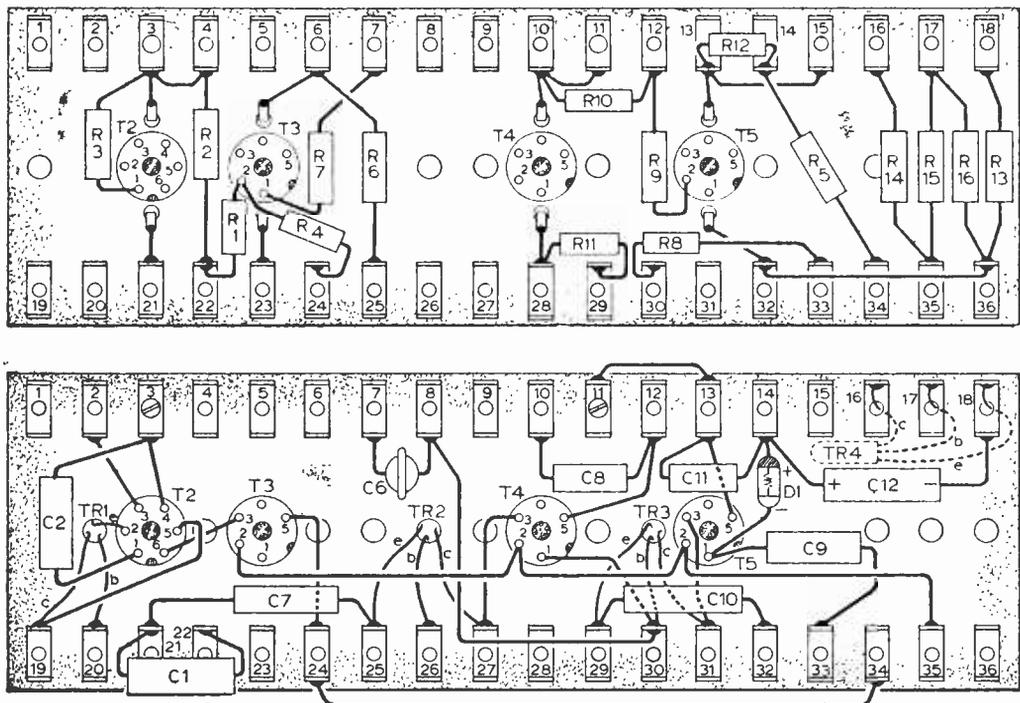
(a) Details of fixing transformer lugs. (b) Details of tag board wiring.
